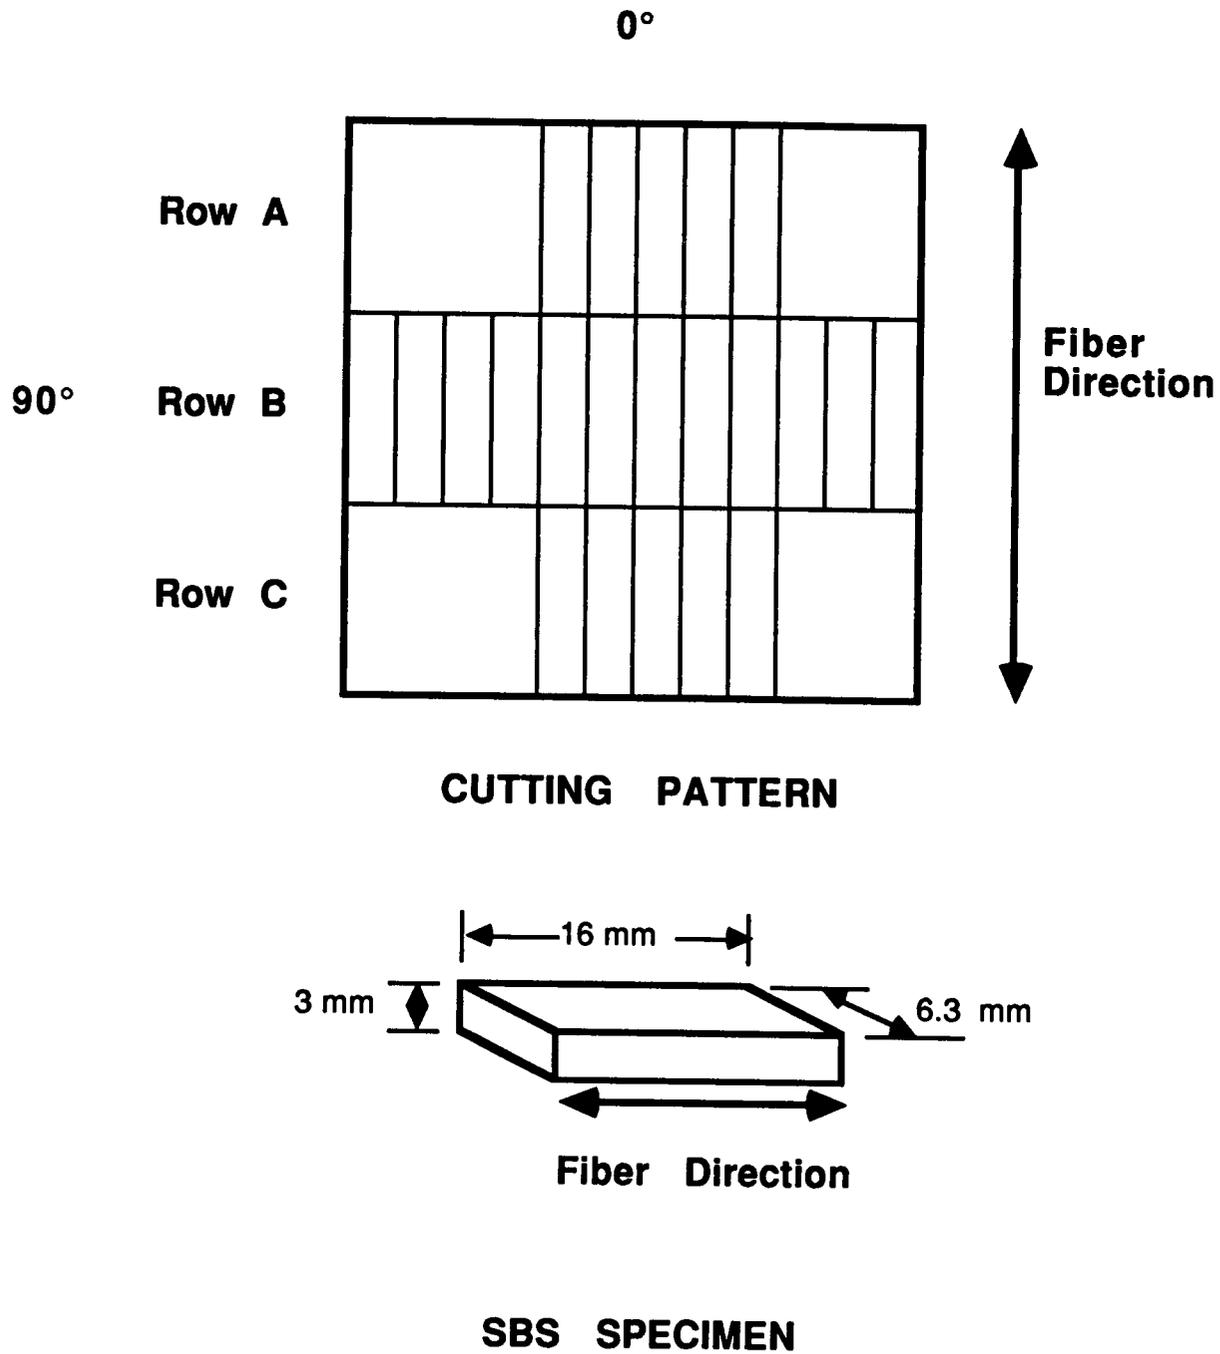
Aged panel cutting pattern and SBS specimen geometry.
